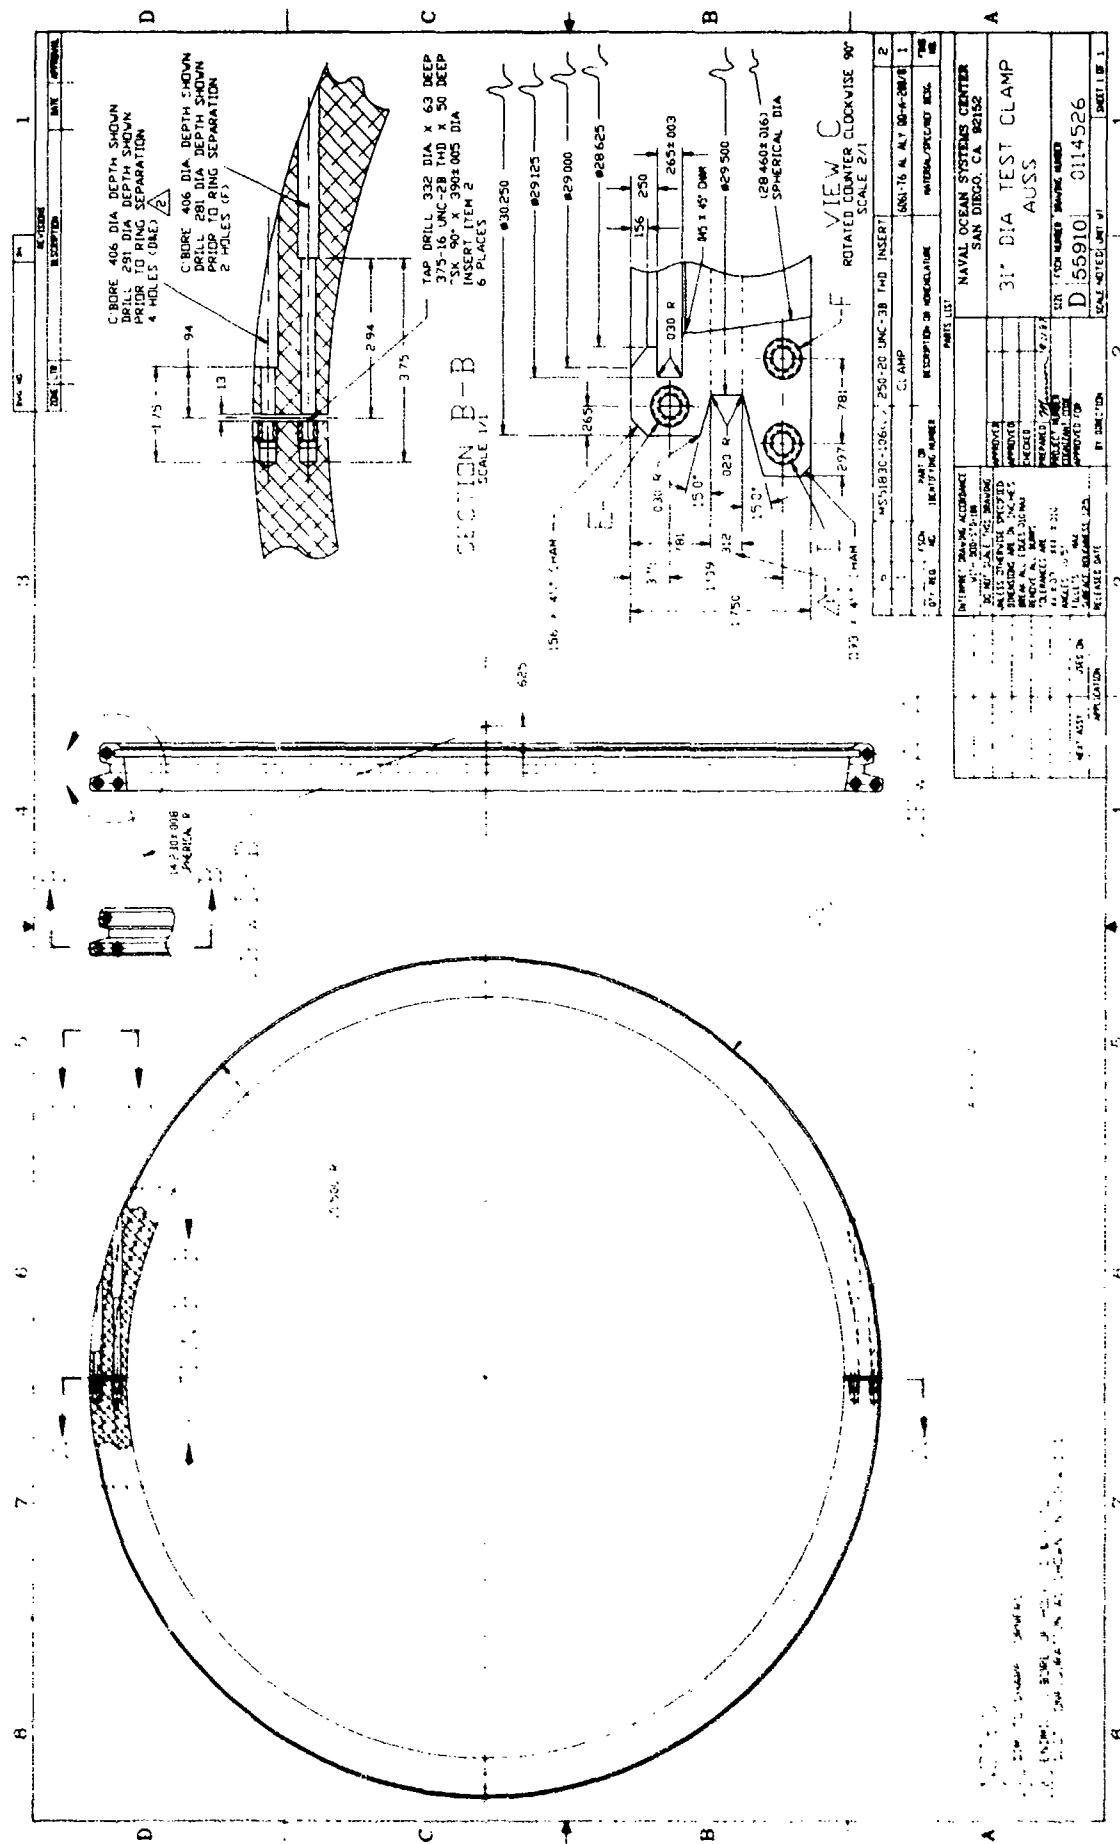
An aluminum test clamp was clamped to the ridge on the equatorial flange of the hemisphere to provide the bearing surface for the wedge clamp during assembly of the AUSS Mod 2 hull for pressure testing (see Figure 13).
